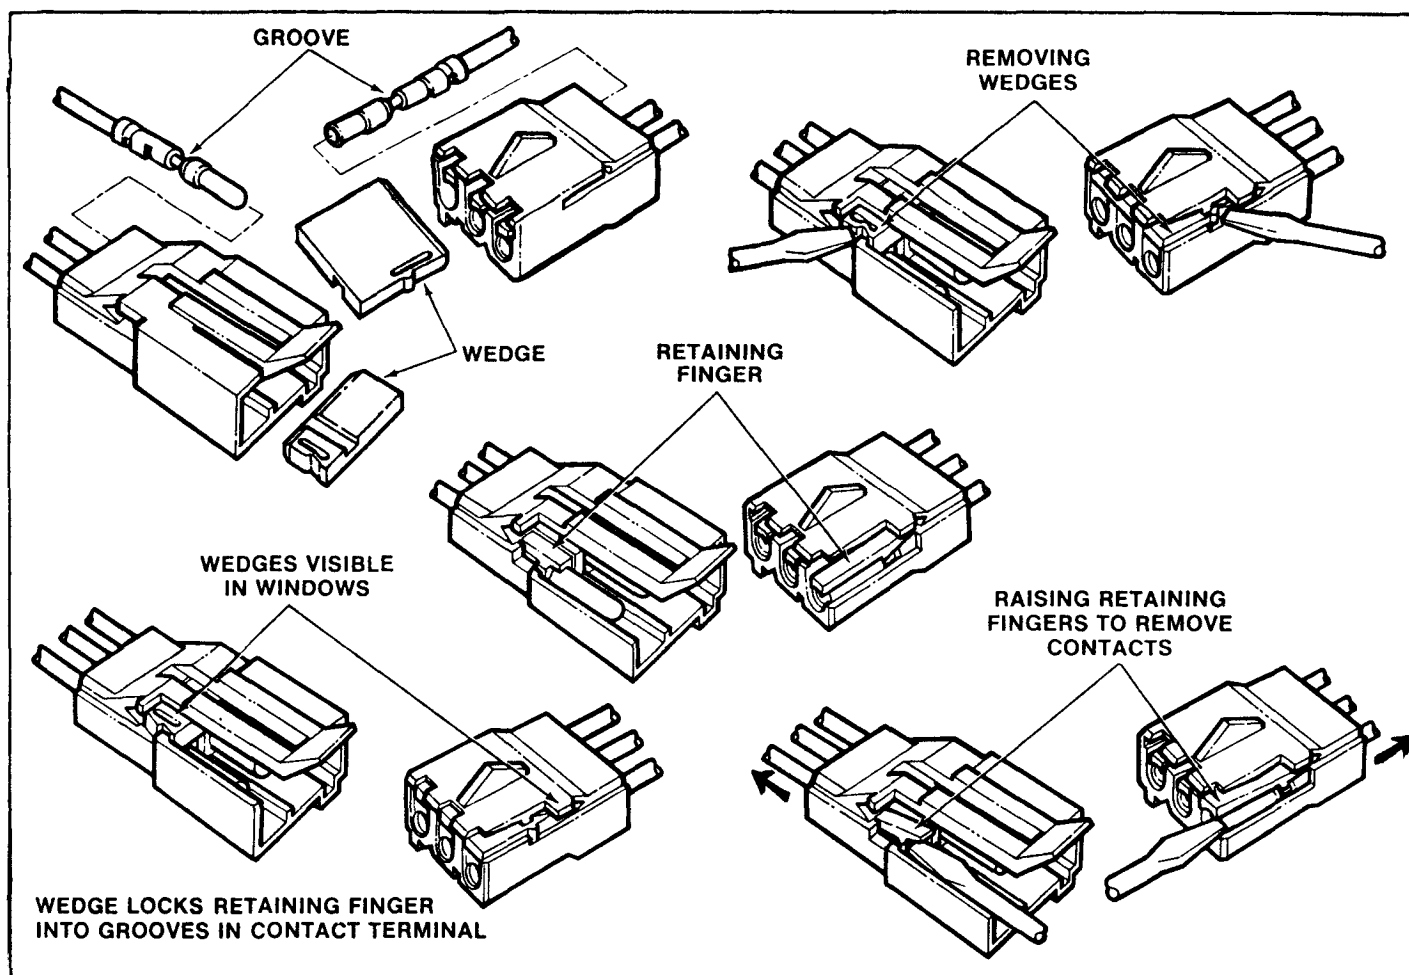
REPAIRING LOCKING-WEDGE CONNECTORS
